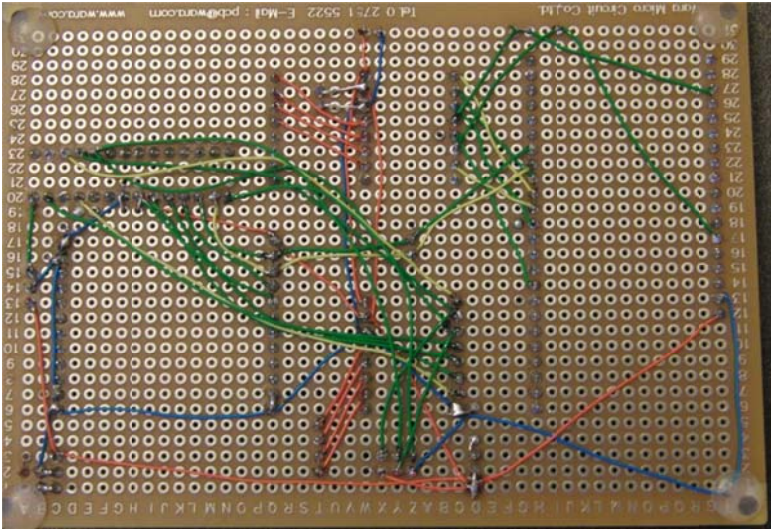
Bottom Side of the Solder Board on the Remote Tank
